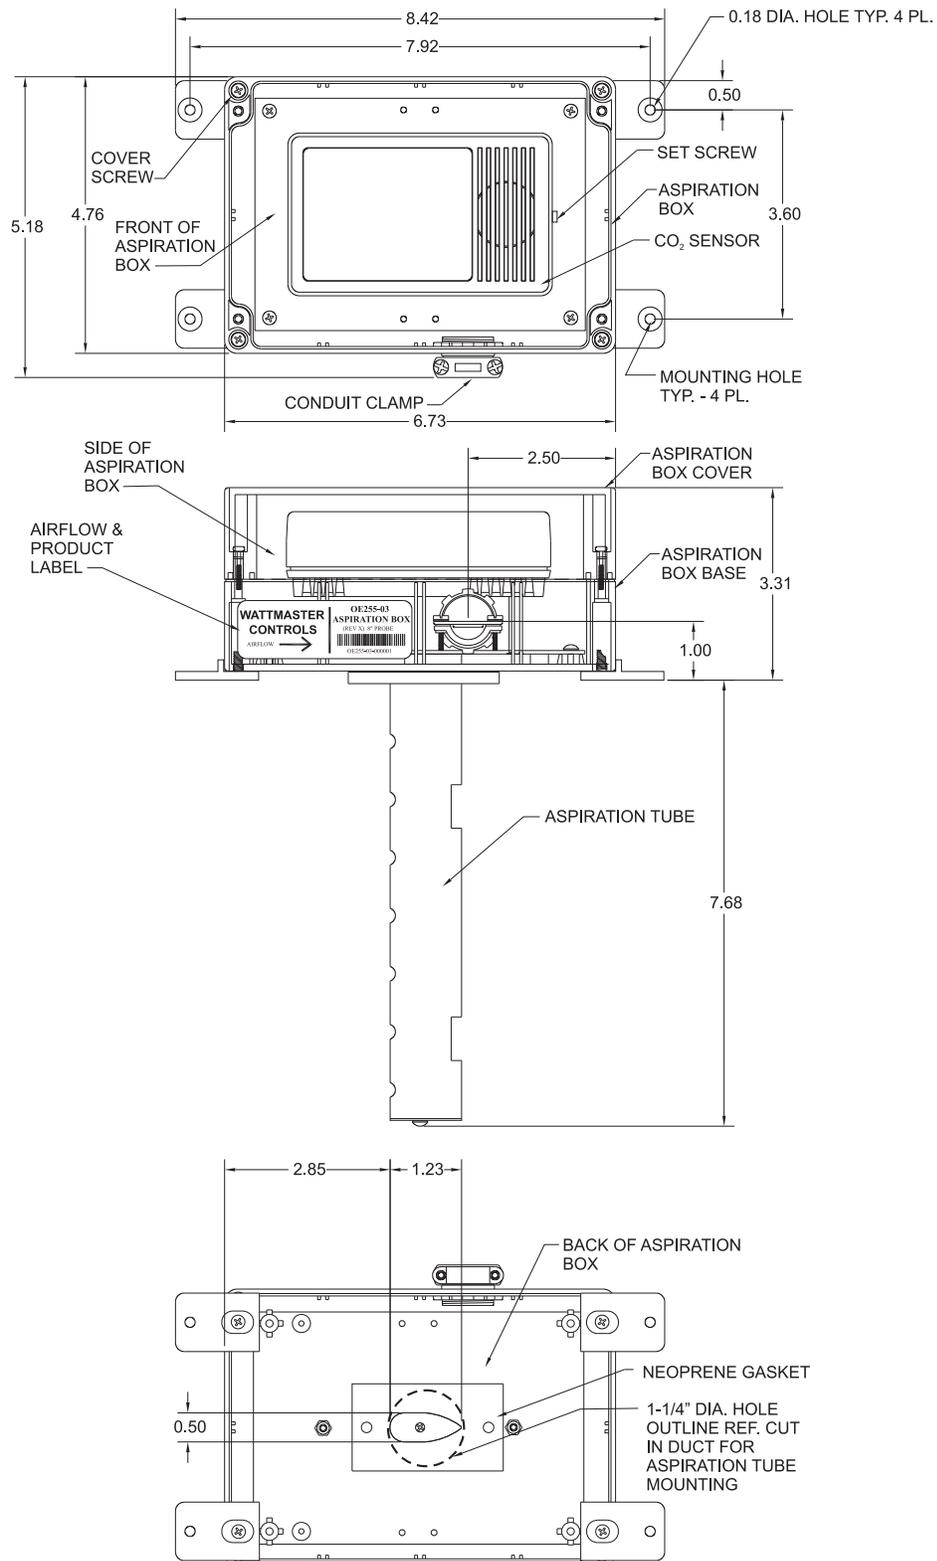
Mounting and Cable Installation for Duct-Mounted CO₂ Sensor
